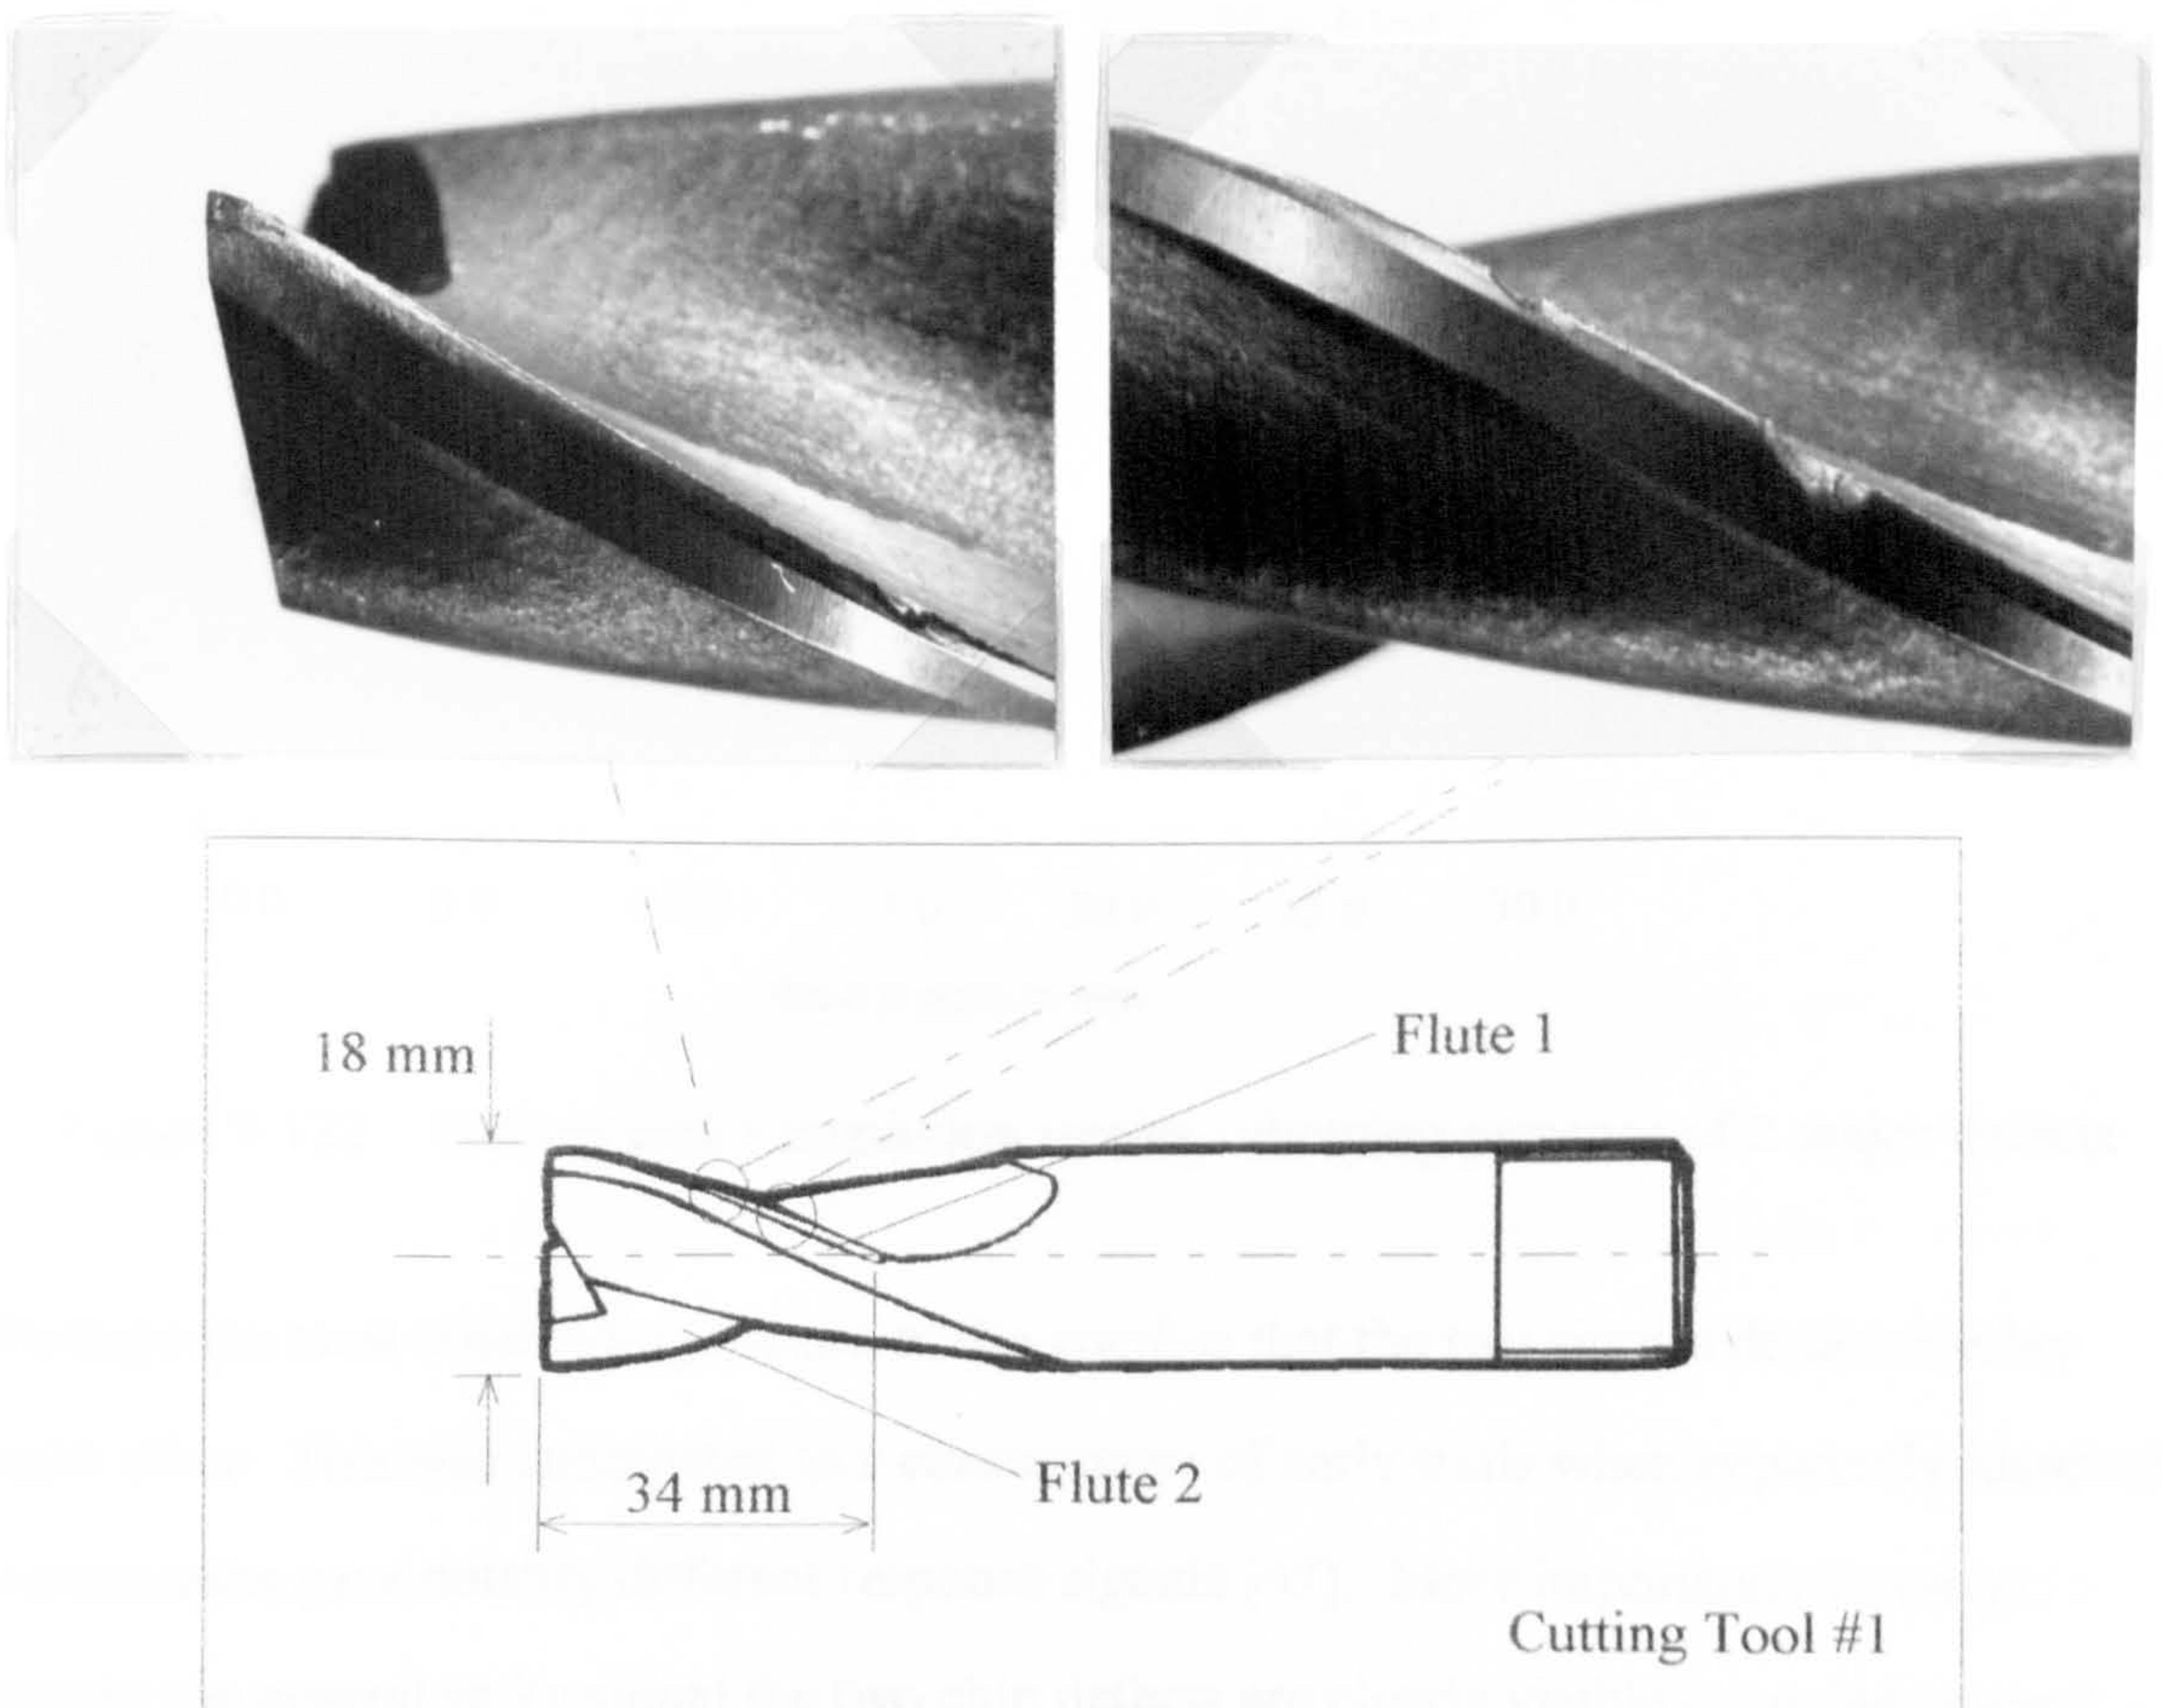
Cutting tool 1 showing defects and defect locations
